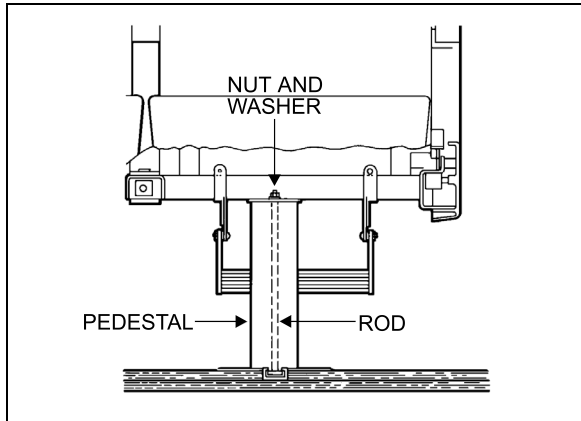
SEAT PEDESTAL ASSEMBLY
